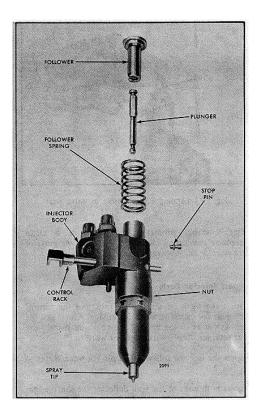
Injector Plunger, Follower and Relative Location of Parts
